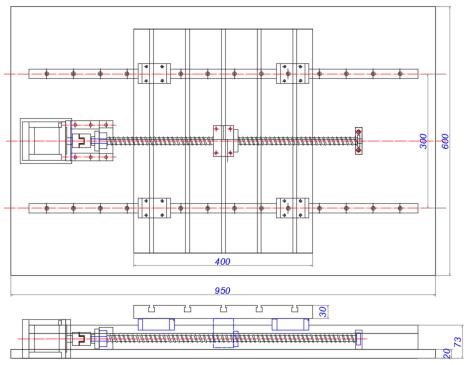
Diagram design of drive system of table machine (moving in x horizontal direction)
